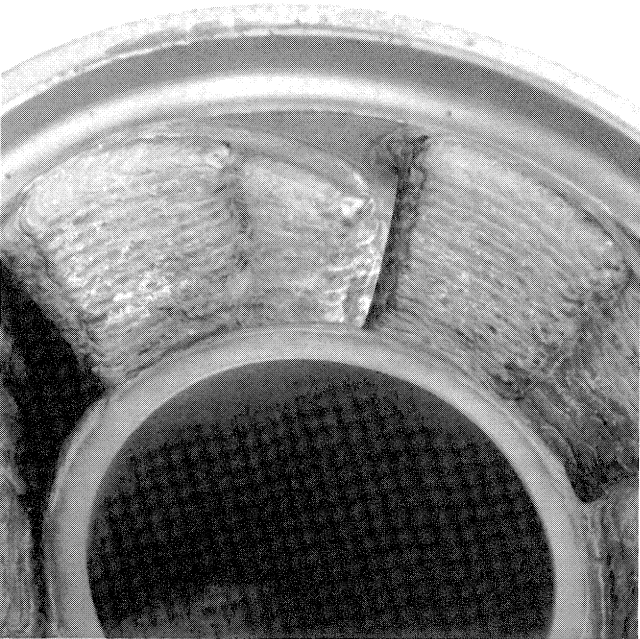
Impeller Vanes Immediately after Surfacing by Welding.
